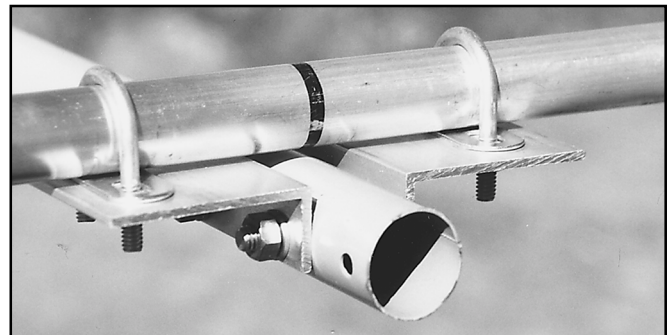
Two pieces of angle aluminum are attached to the boom with two nuts, bolts and lock washers. Your drilling must be accurate, so use a drill press if possible. In addition to drilling the boom holes, you'll need to drill four holes in each angle piece: two for accepting the boom-mounting nuts and two for the U bolts that will hold the element.
